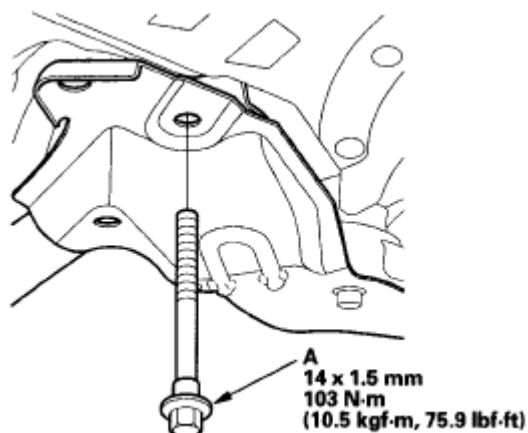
Identifying Front Subframe Front Mounting Bolts (With Torque Specifications)
